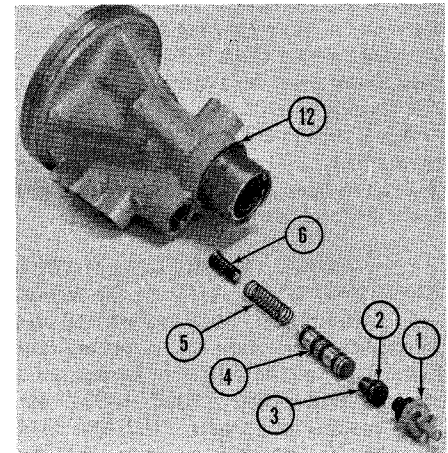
Exploded view of Hydramotor housing and blocking valve components. Blocking valve can be removed without disassembly of Hydramotor.
